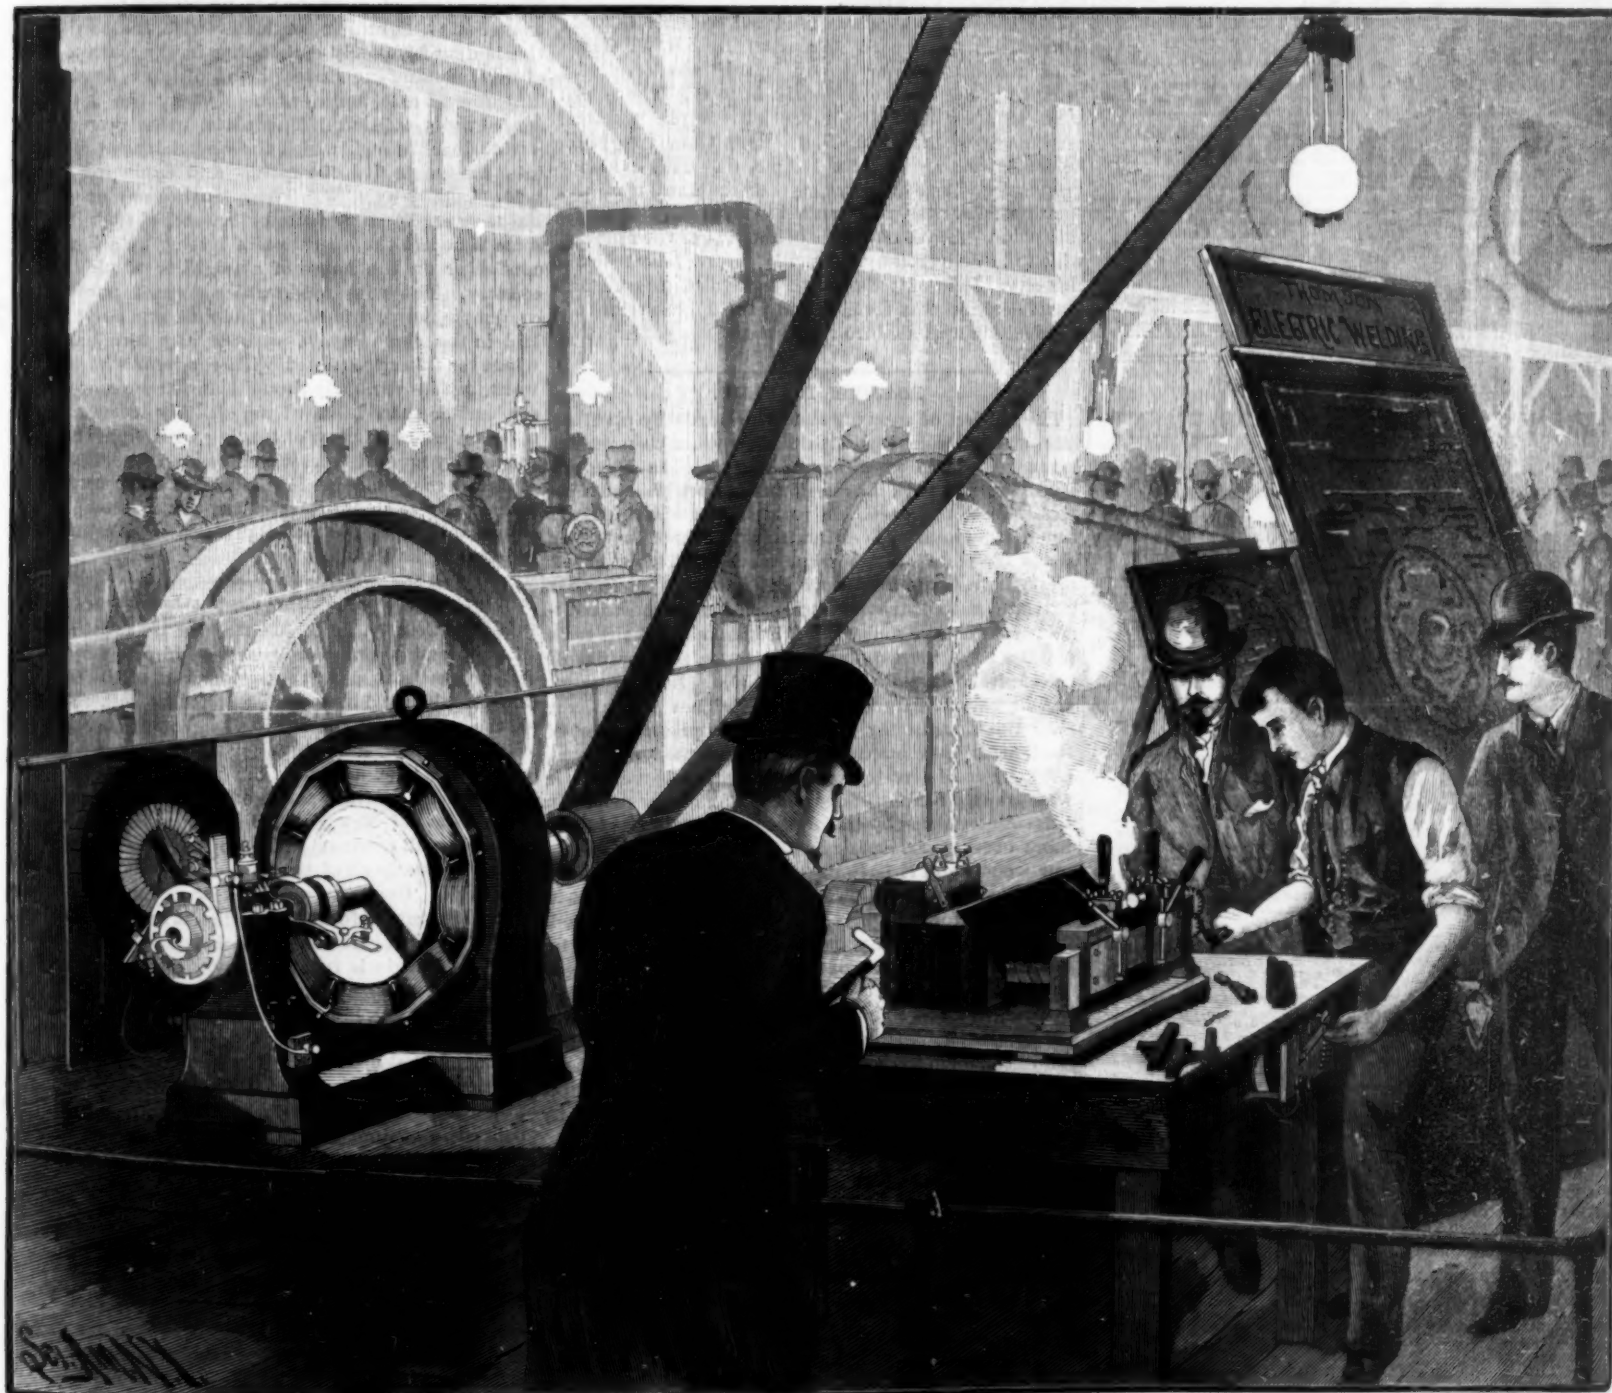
ELECTRIC WELDING AT THE AMERICAN INSTITUTE FAIR, NEW YORK.—PROFESSOR ELIHU THOMSON'S PROCESS.
